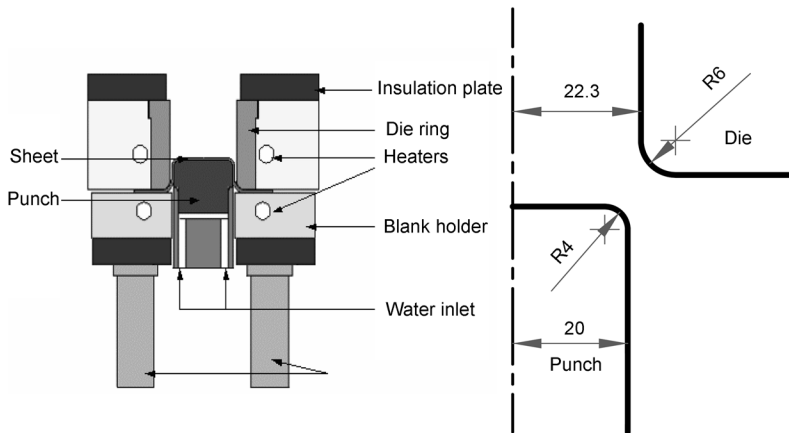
Schematic view/dimensions of the round tool. Courtesy of Aida-America Corporation
